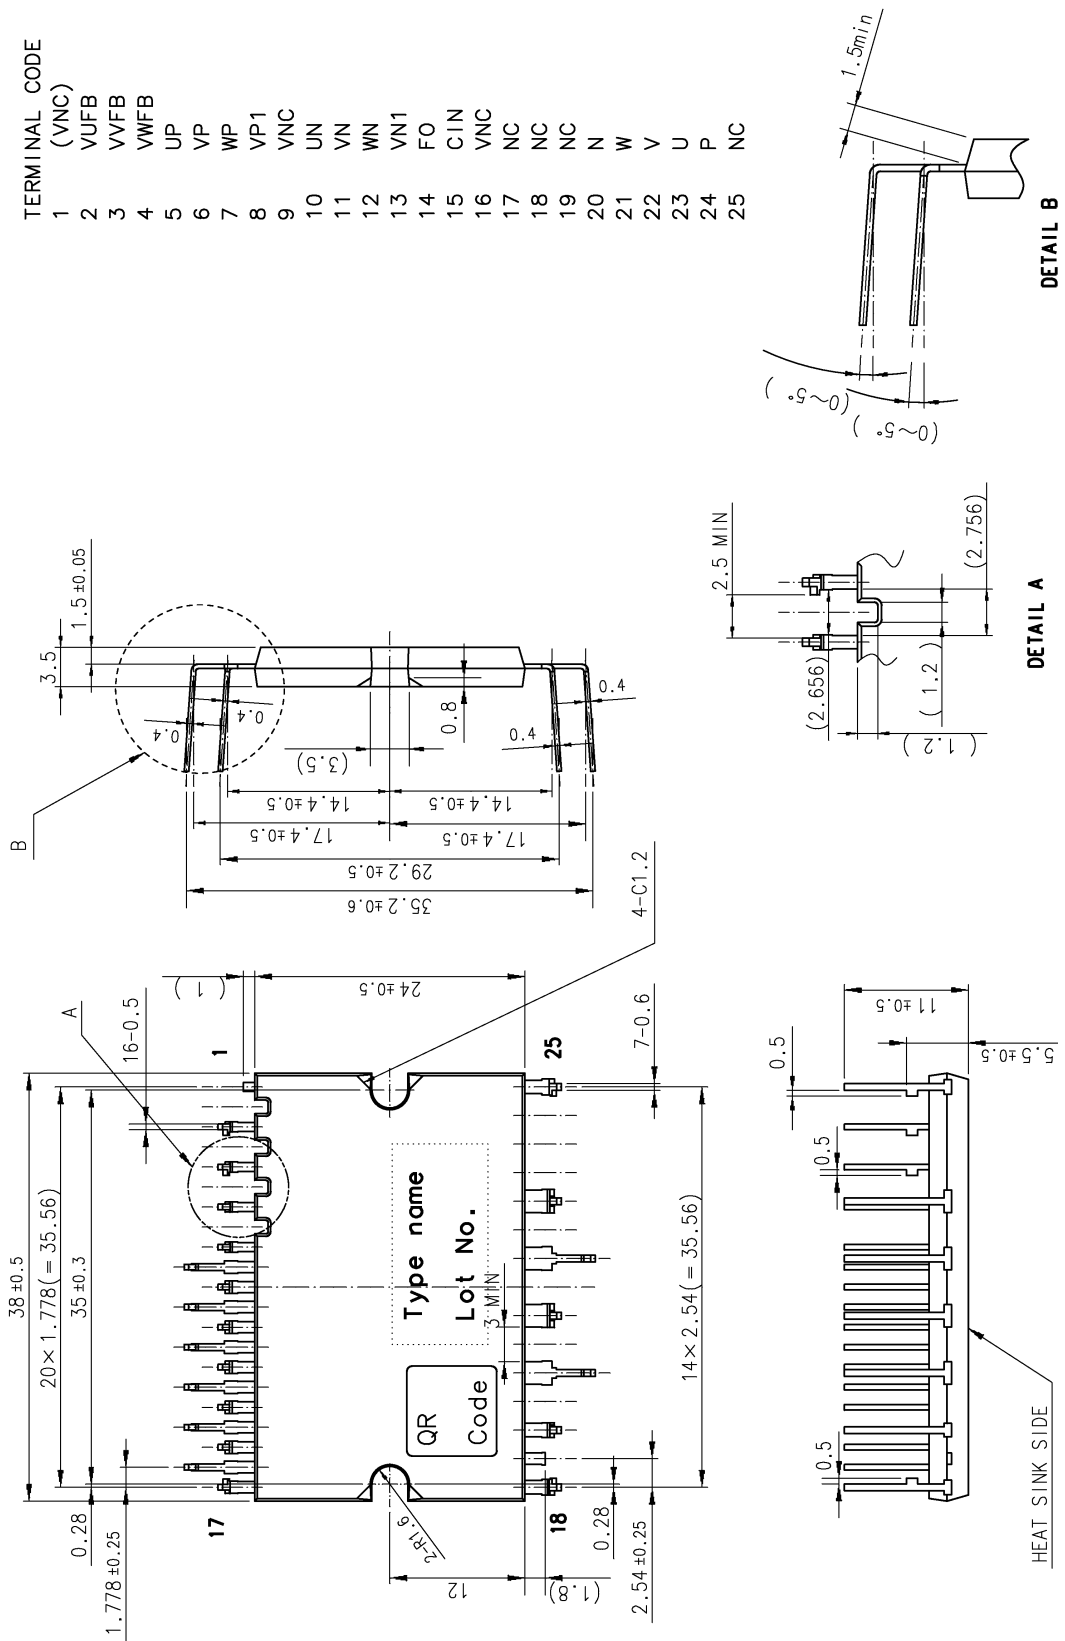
Both sides zigzag pin type package(-4W/-TW) outline drawing
